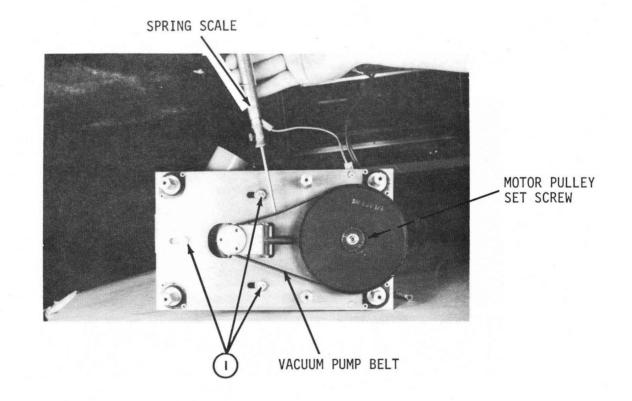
Adjustment of Vacuum Blower Motor Belt Tension
